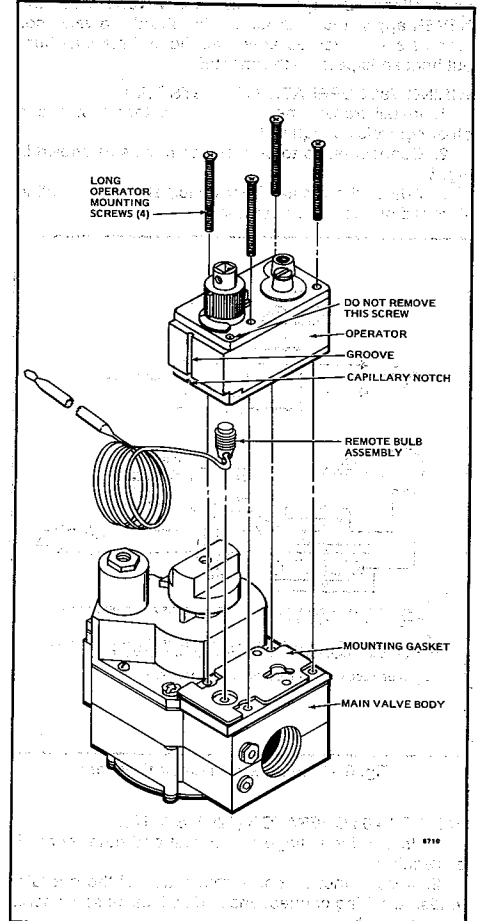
Mounting the V504 or V524 operator on a high capacity valve. (Direct-mounted dial shown.)
